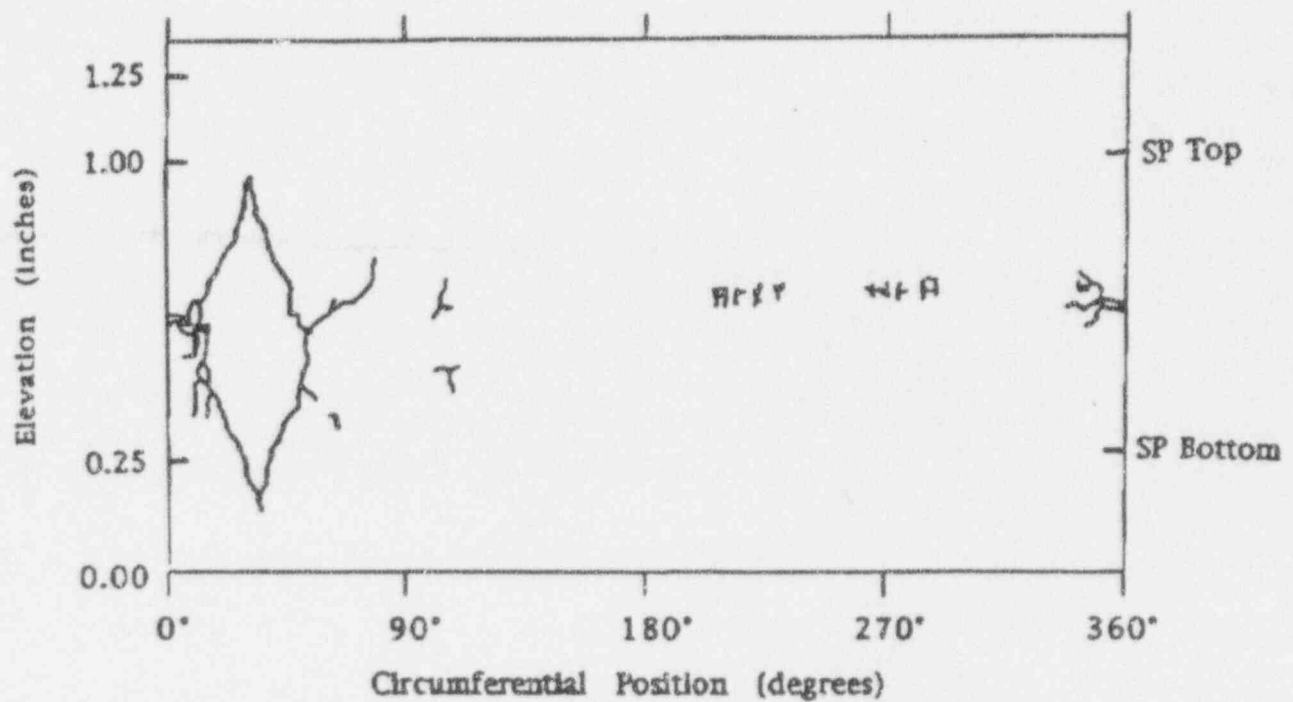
Sketch of the OD surface crack distribution found at the third support plate (SP3) crevice region of tube R42-C44. Also shown is the location of the burst fracture opening. (The burst opening extended beyond the SP crevice region, but the corrosion cracking on the burst fracture was confined to the crevice region.)
